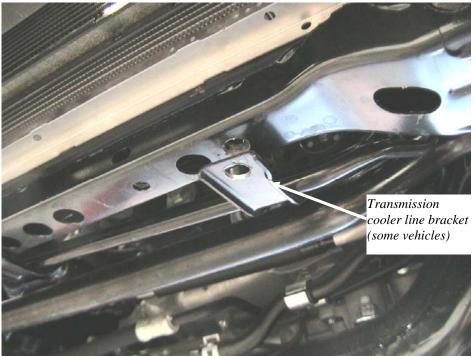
Left side transmission cooler line bracket with hole enlarged to 1/2"
